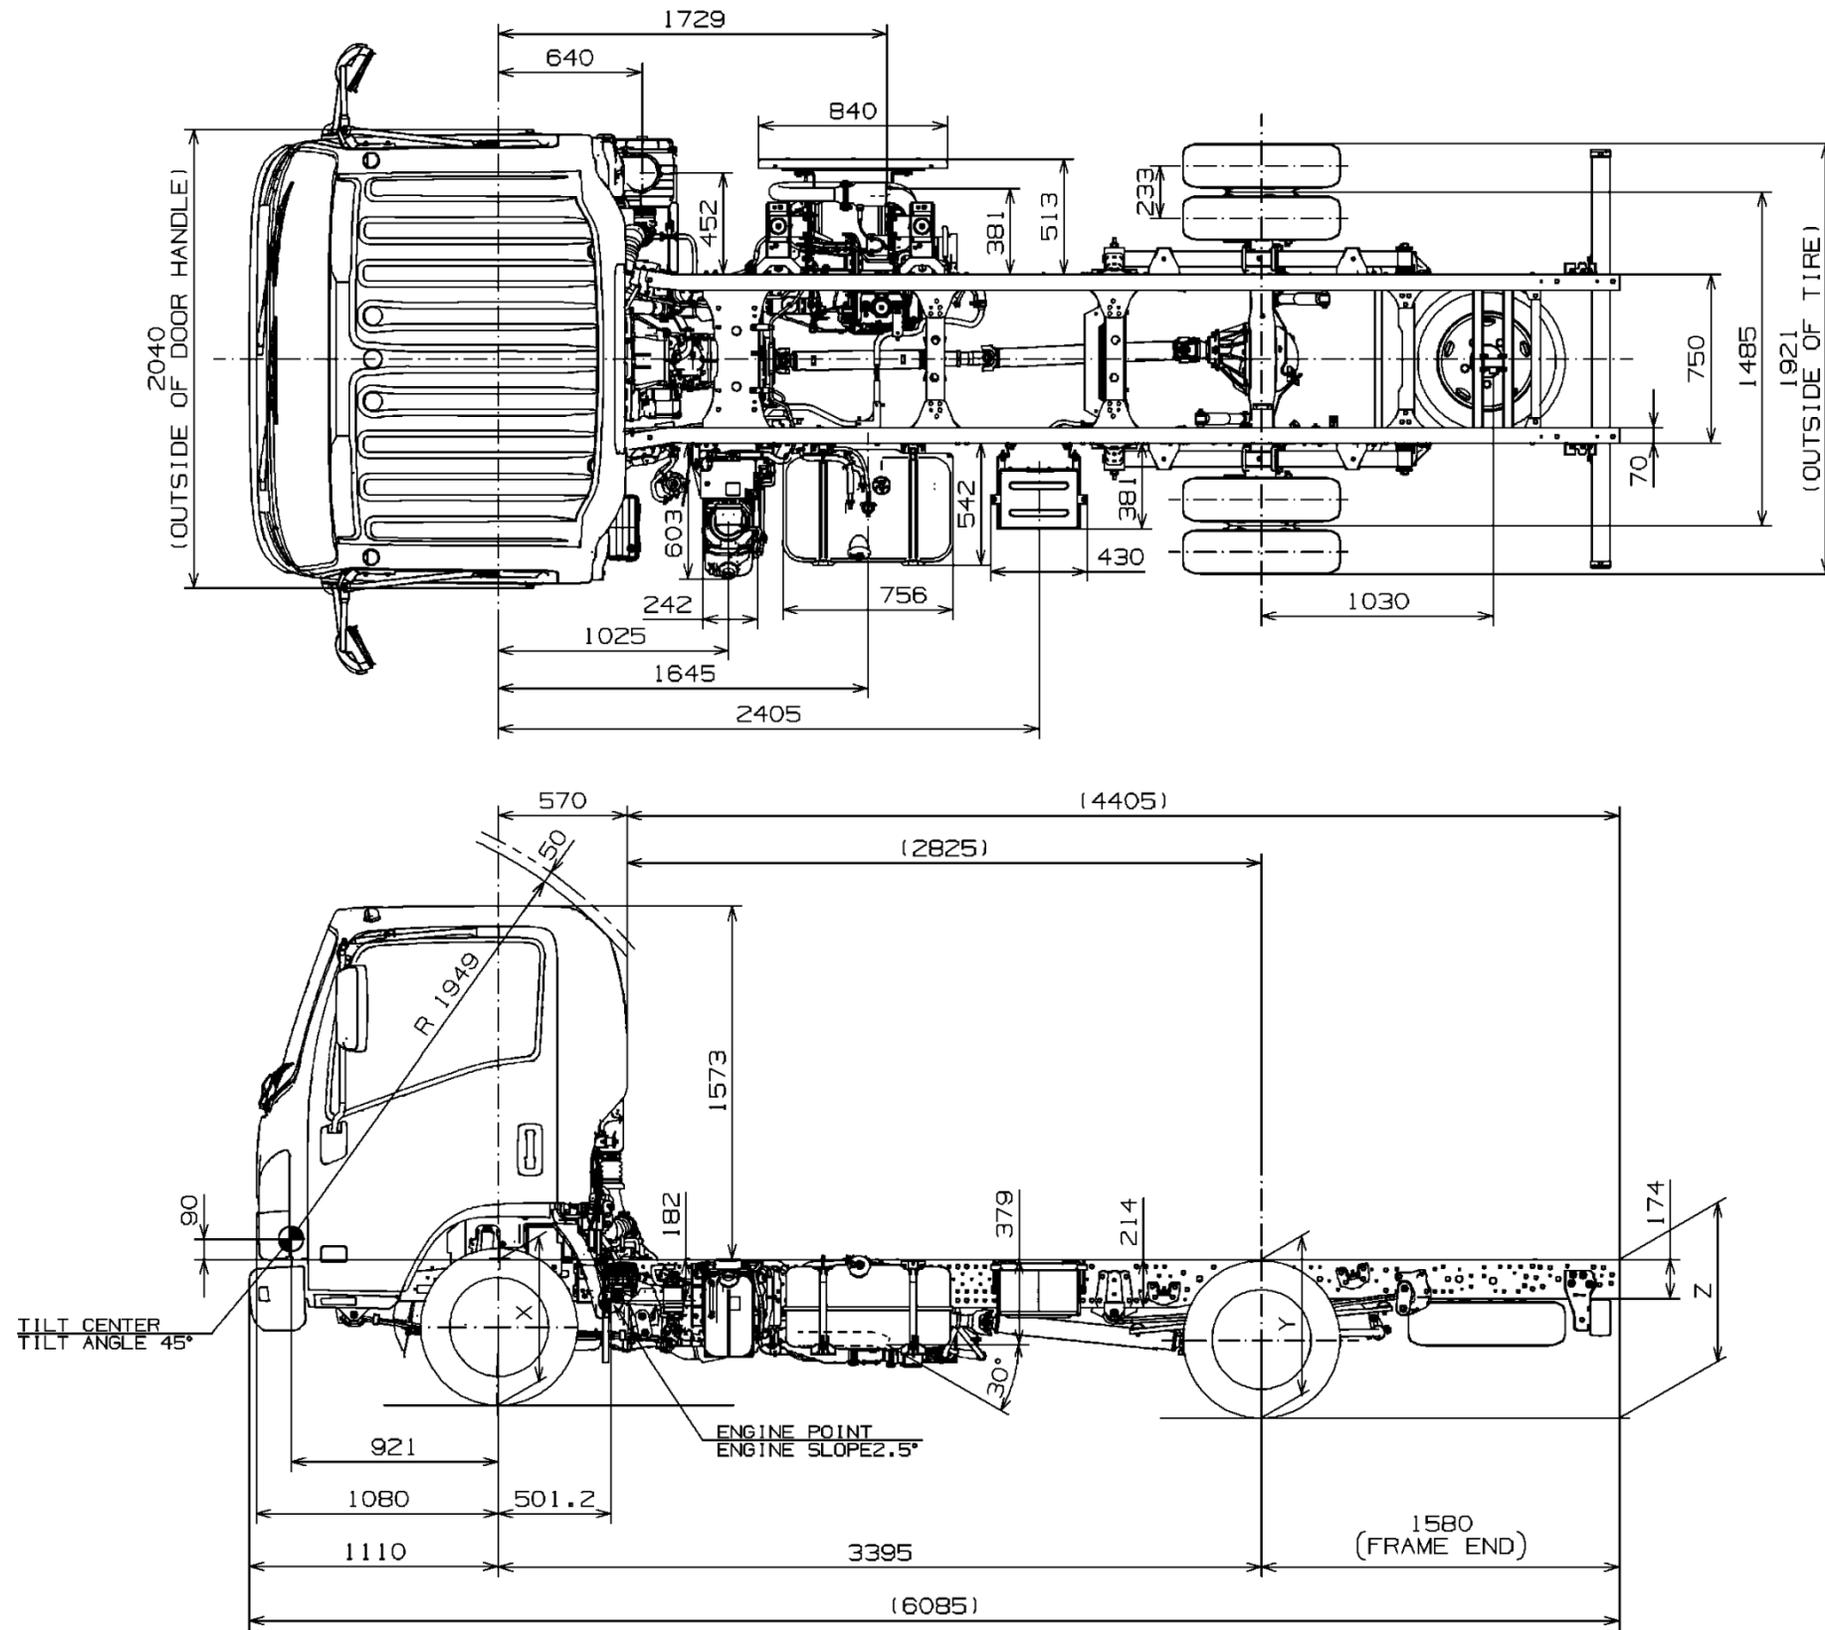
Cab Chassis Drawing NPR85L/U-HL5VAYE
